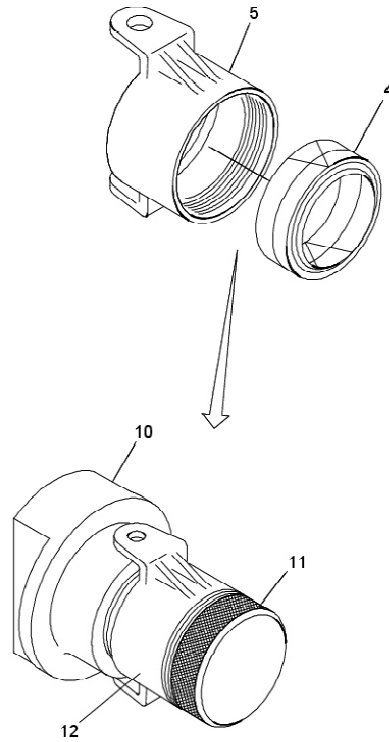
T/R Pitch change housing duplex bearing removal (Sleeve assy P/N 109-0130-94)
